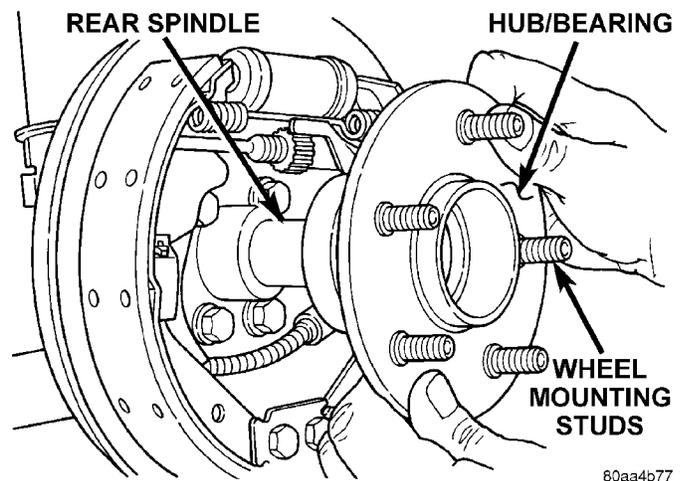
Hub/Bearing Removal From Spindle (Drum Brakes Shown)
